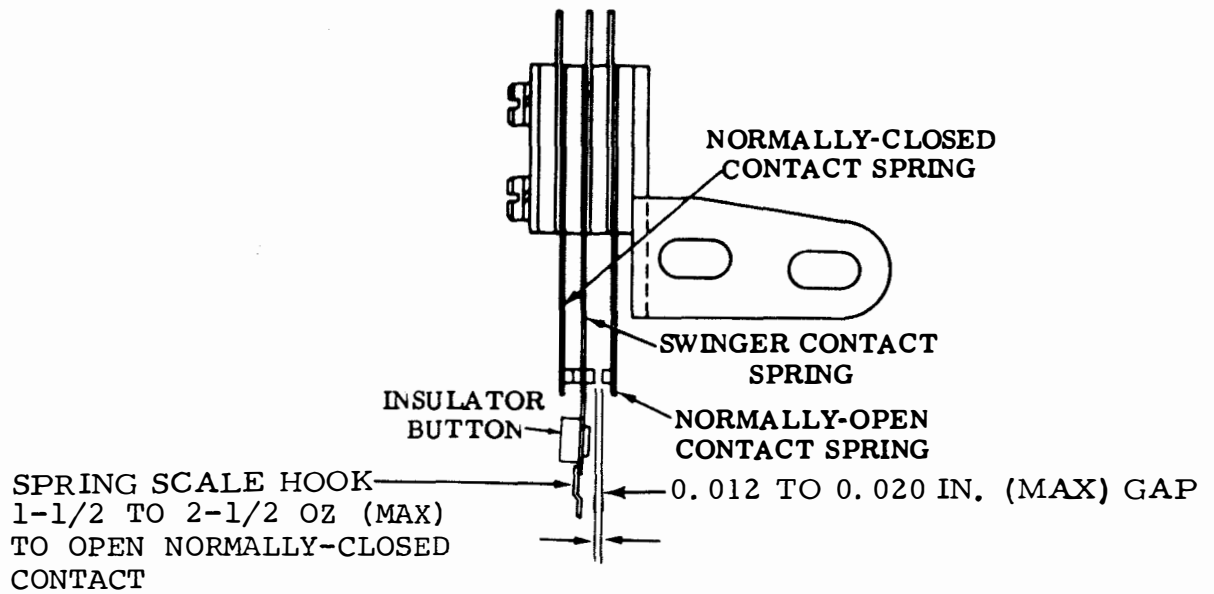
Contact Swinger and Contact Spring Gap (Preliminary), Reperforator, Front View
